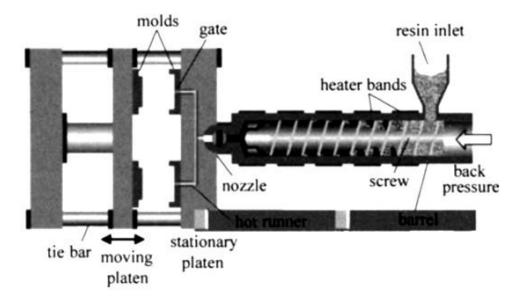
Components of an injection moulding machine (Ren, 2011).
